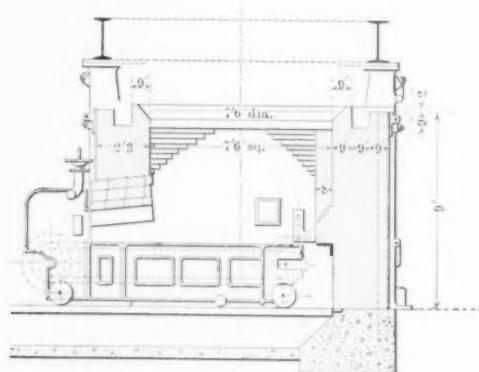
SECTION OF FURNACE OF THE BOILER SHOWN ON PAGE 279
